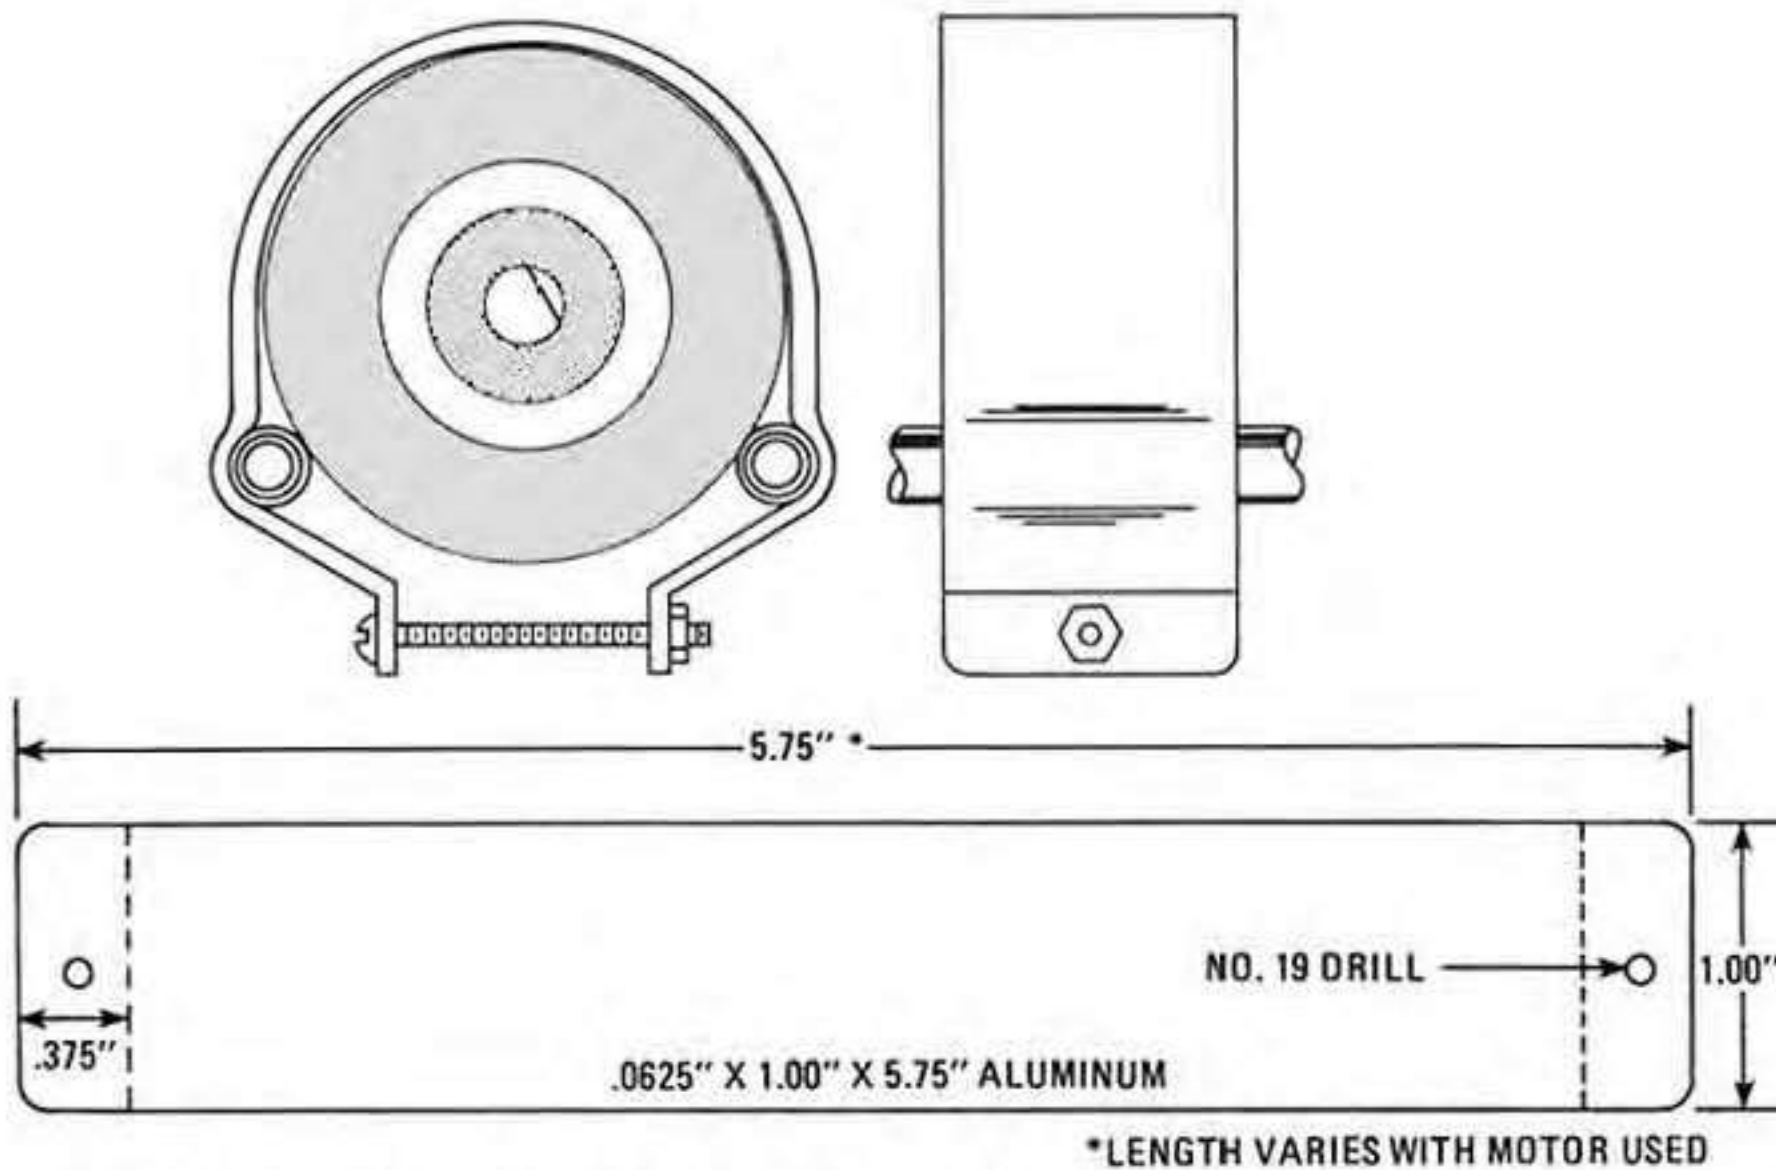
ATTACHMENT OF DC motor to side rods. Clamp dimensions will vary according to the particular motor used.
